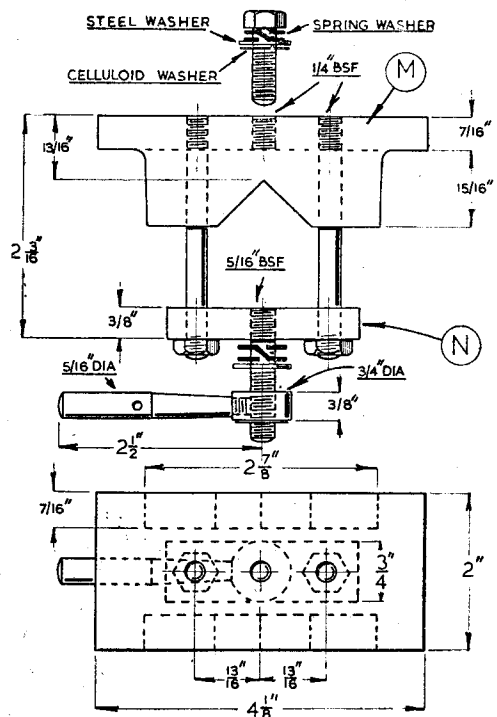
Constructional details, "M"—upper V-block; "N"—stirrup
